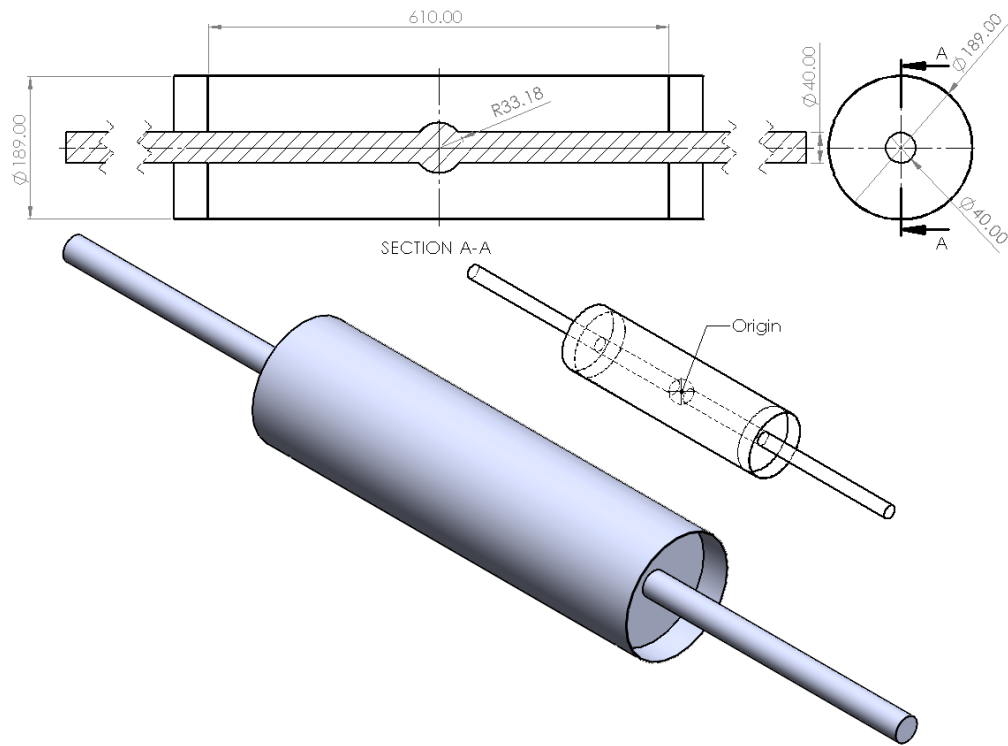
Schematic of sand damper model equipped with an enlarged single sphere of radius 33.18 mm.
